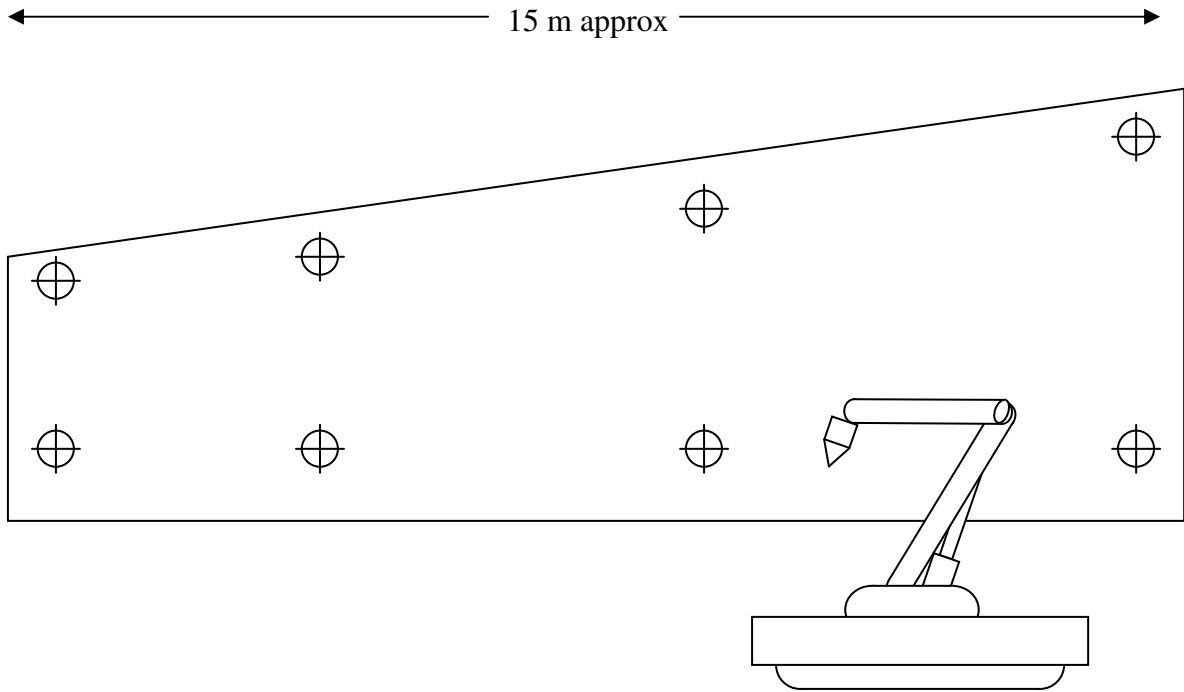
Example of mobile robot working on a large component (wing section)
